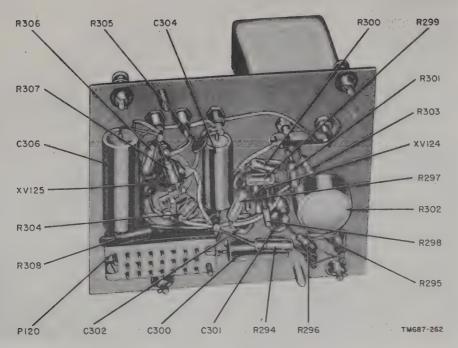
60-cps modulator plug-in assembly, bottom view.
